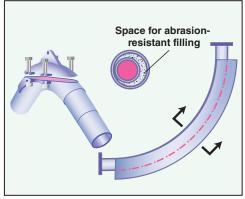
A wearback elbow design can either be a replaceable hardened piece or a wearable inner core with abrasion-resistant filling
